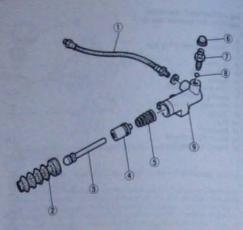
Exploded view of the clutch slave cylinder (Sec 5)
